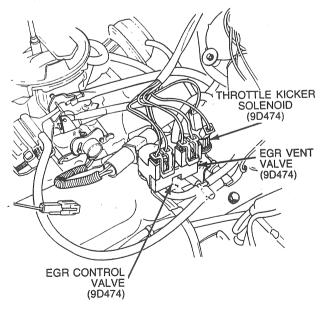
EGR and kicker solenoids. (Courtesy of Ford Motor Co.)
